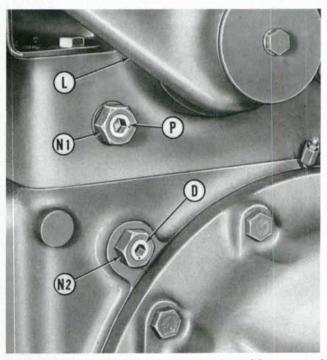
View showing location of position control eccentric pin (P) and draft control eccentric pin (D) at right rear corner of lift cover and rear axle center housing. Refer to text for adjustment procedure.
